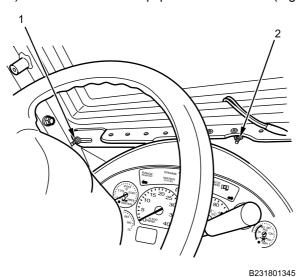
Cross-Vehicle Equipment Bracket Nut Left Side Interior Locations.
